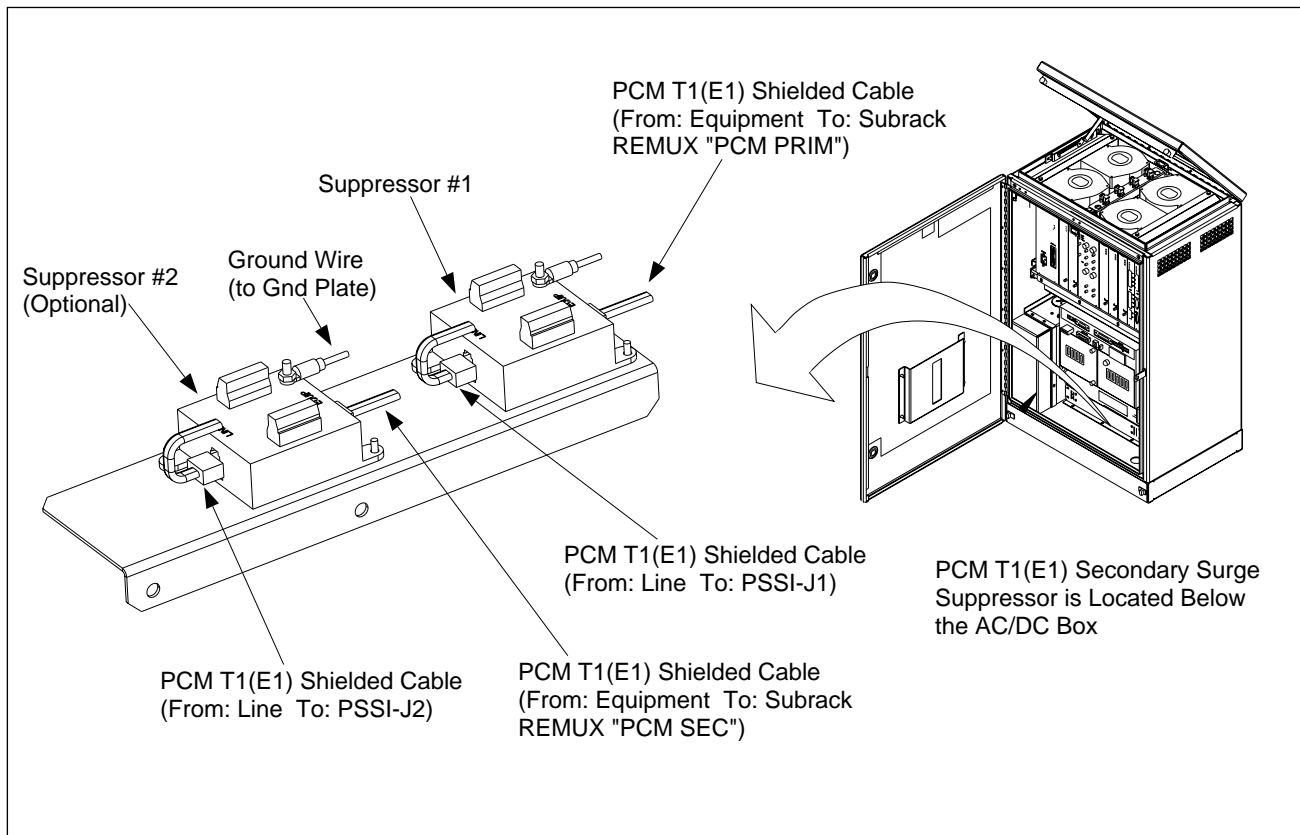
PCM T1(E1) Secondary Surge Suppressor Assembly
